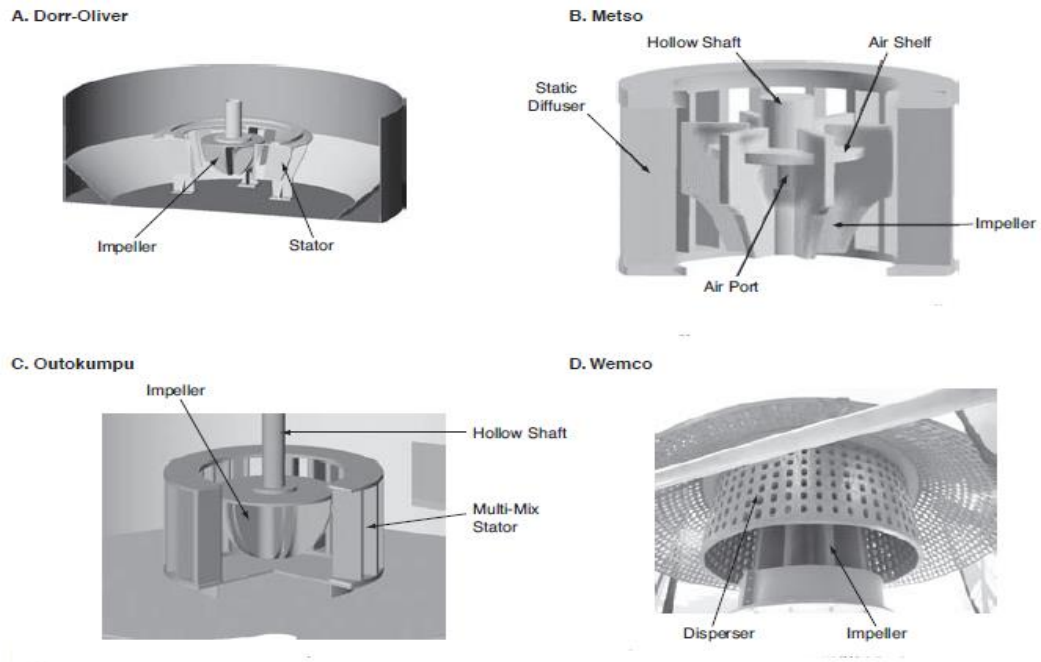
Diverse types of rotor-stator designs of the different machines [16]
